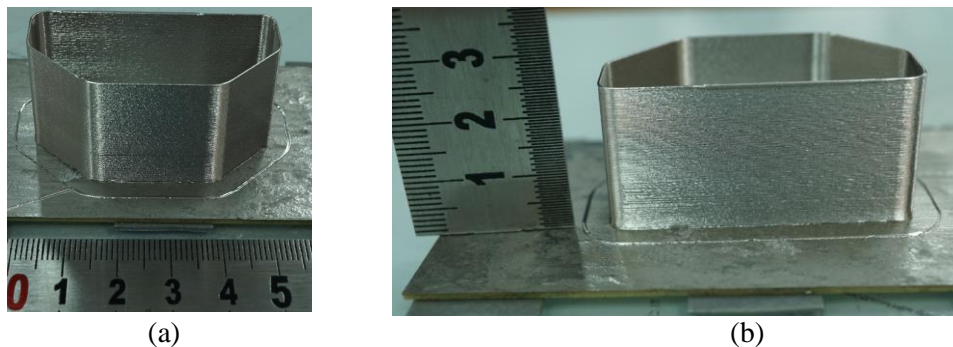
The printed male shell consists of 125 layers; a) front view and b) back view
